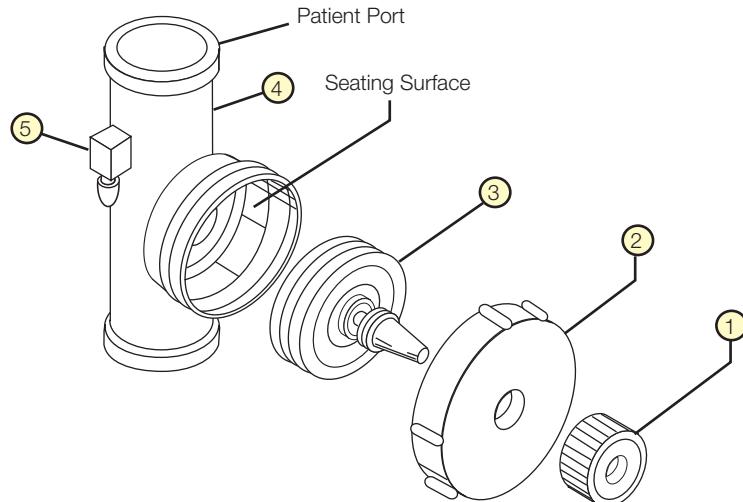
Line Drawing of Ventilator (Exploded View with Callouts)
